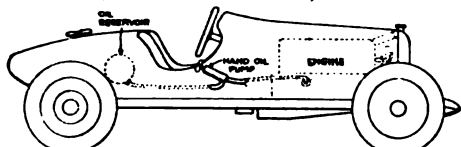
Suggested method of connecting oil pump on side of rear body with oil tank in rear and motor crankcase
